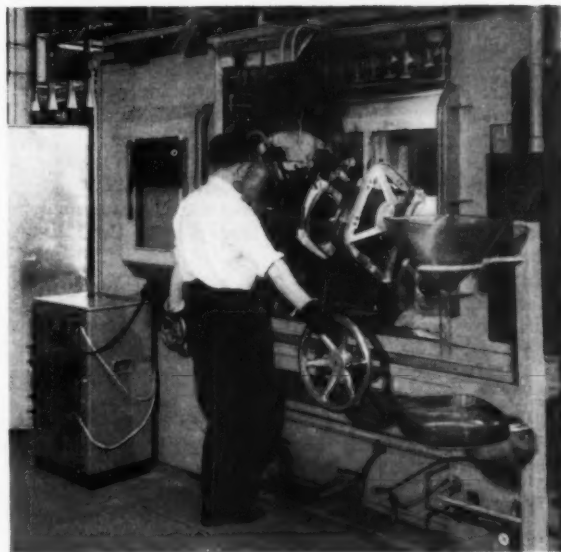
Joining faces and backs of tube bulbs by the automatic arc welding process. The two components before being joined together are seen on the stand at the right of the photograph
